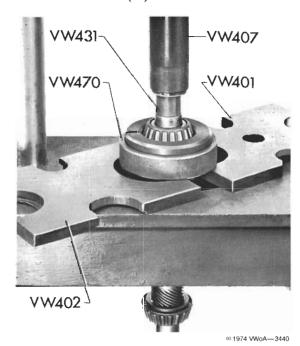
Tapered-roller bearing inner race being pressed off drive pinion. The split-ring collar must not contact the roller cage.
